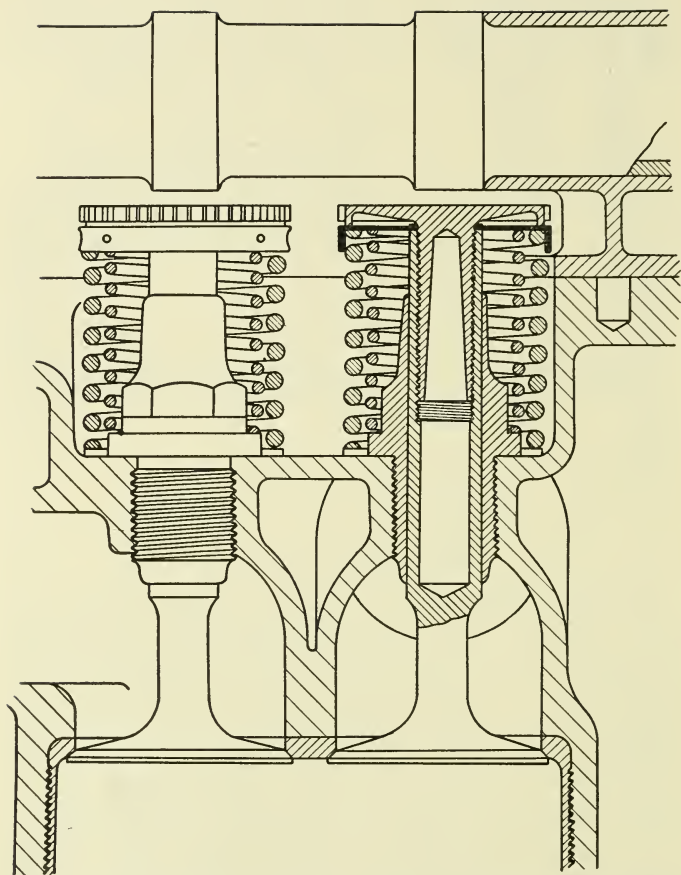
ON THE HISPANO-SUIZA ENGINE A SPECIAL ARRANGEMENT FOR ADJUSTING THE VALVE CLEARANCE BY INSERTING A SCREW IN THE VALVE-STEM IS EMPLOYED
